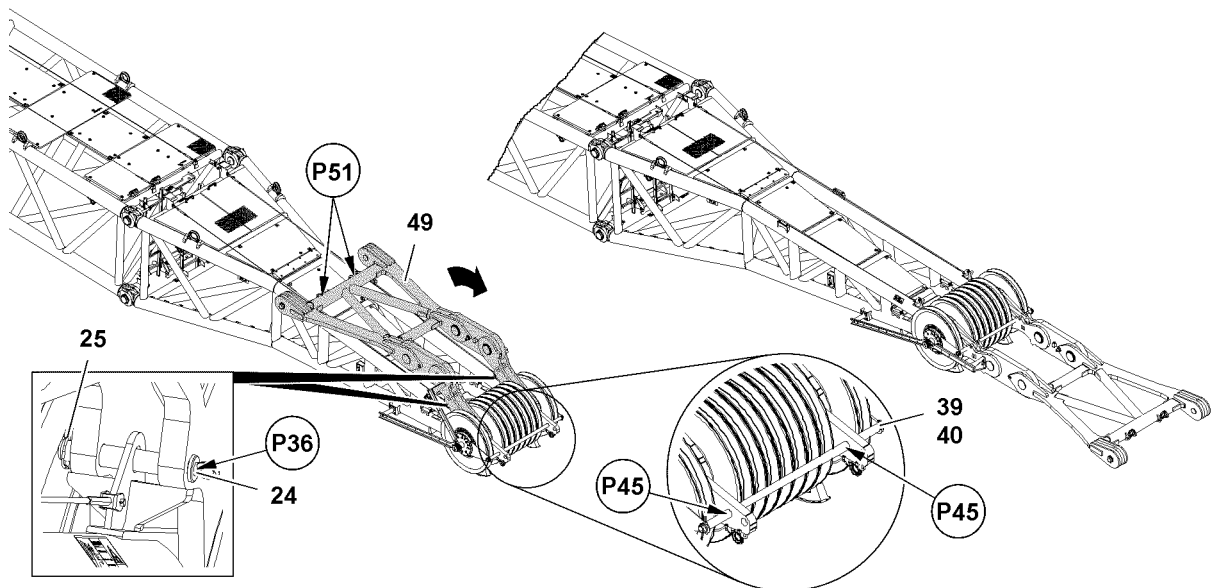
Assembling WA-frame 1 on the end section — Swinging the cross beam around
